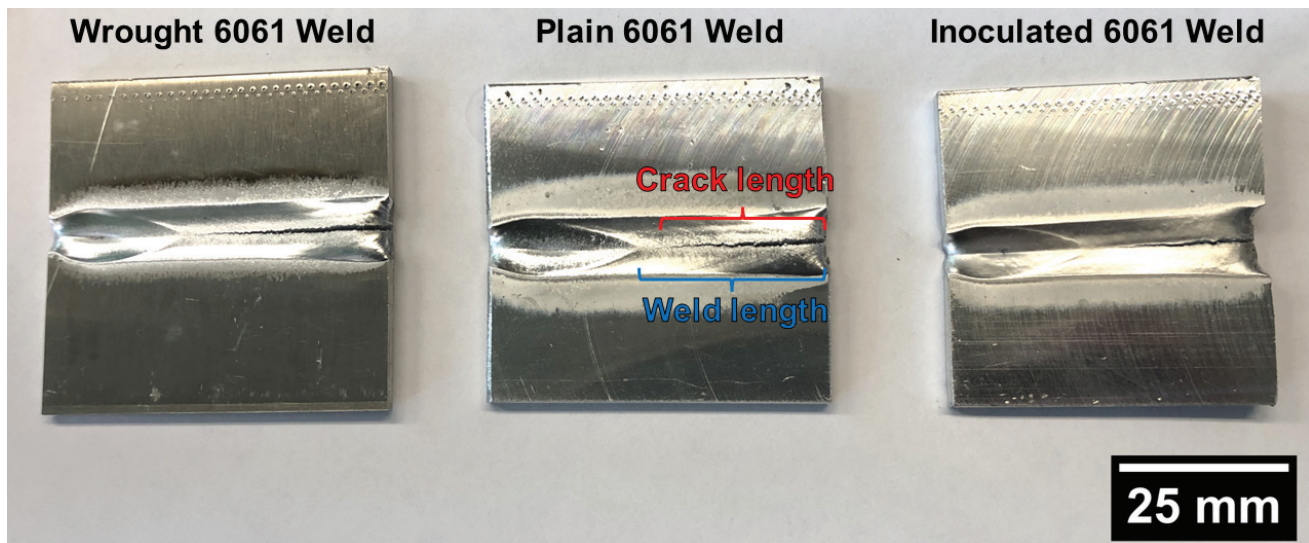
Photo of representative samples welded with parameter set 2 (424.4 kJ/m). The relevant dimensions used to calculate % cracking are shown in the center photo.
